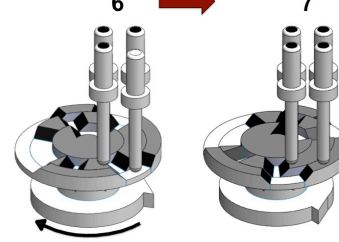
The raised and recessed surfaces on the disk cause the numbers 0-9 to be displayed as the disk rotates clockwise
